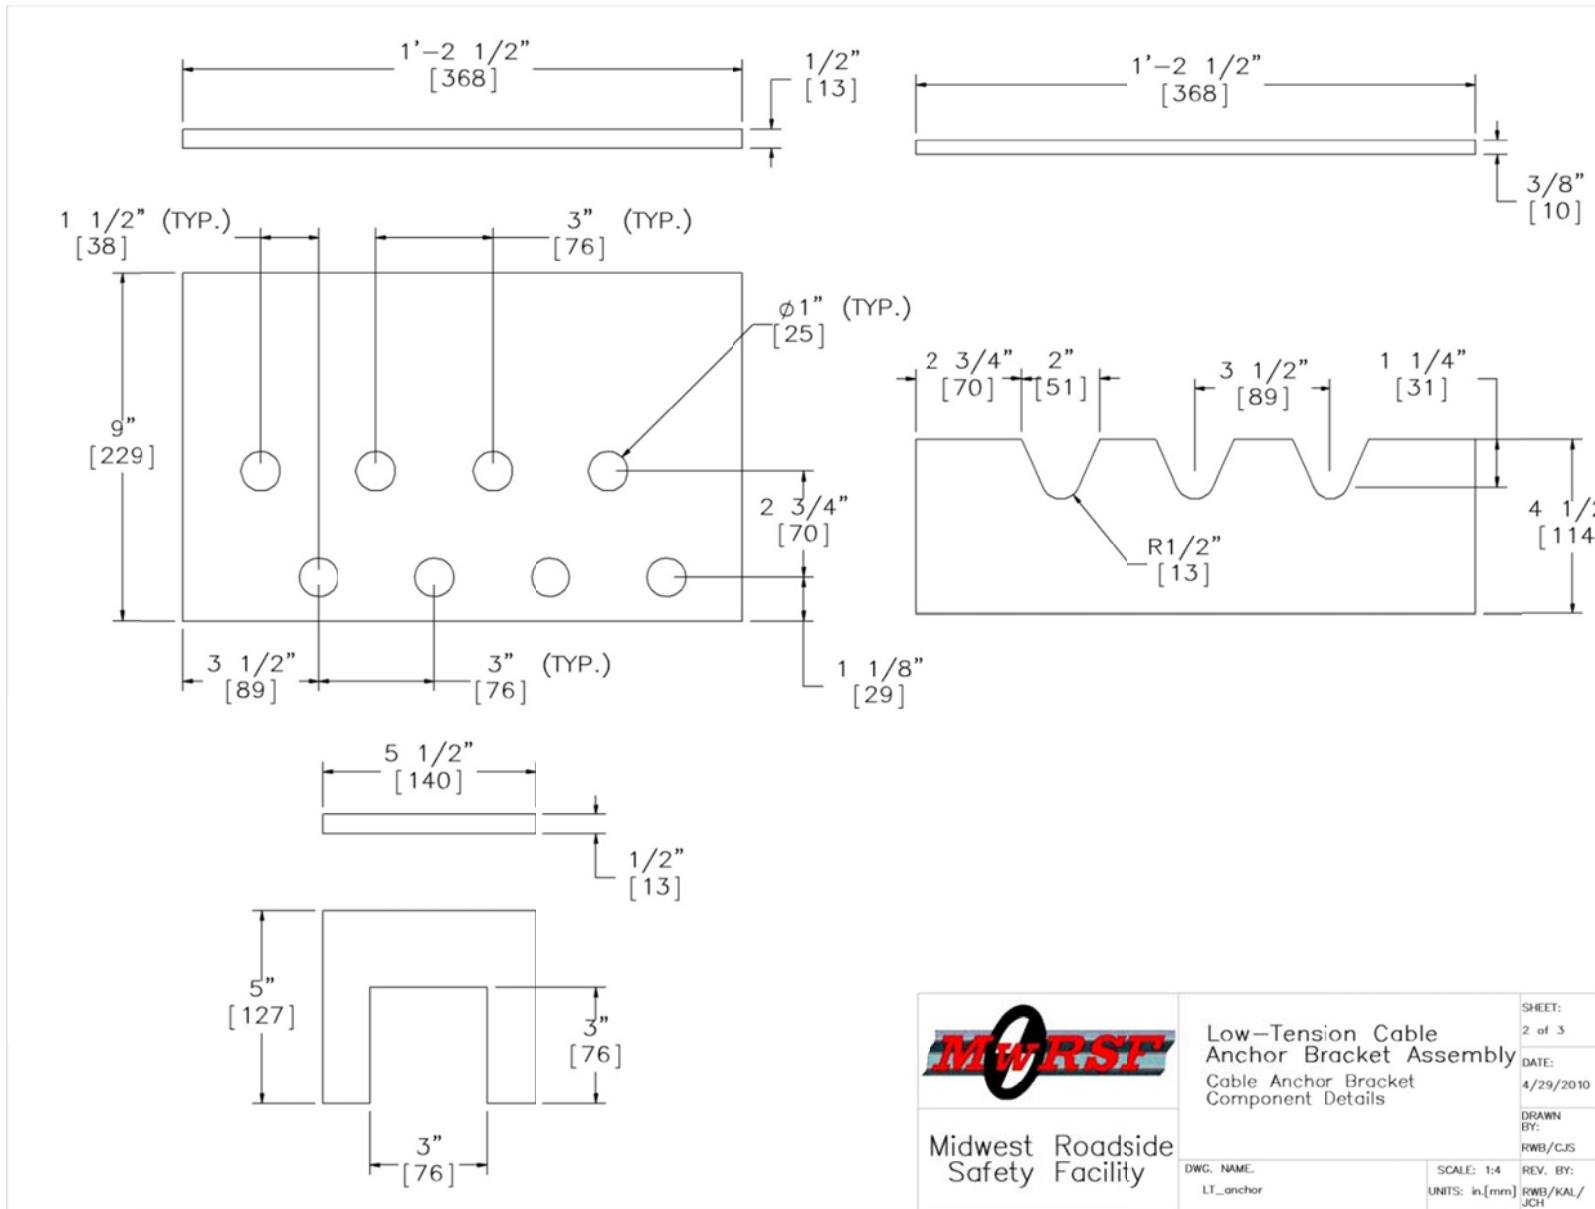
Low-Tension, Cable Anchor Bracket Component Details
